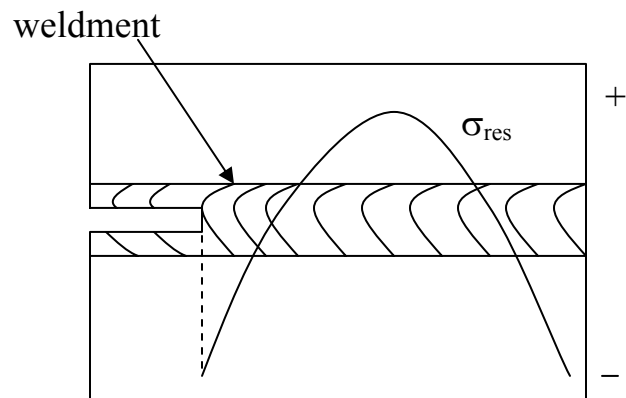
Parabolic Welding Residual Stress Pattern
